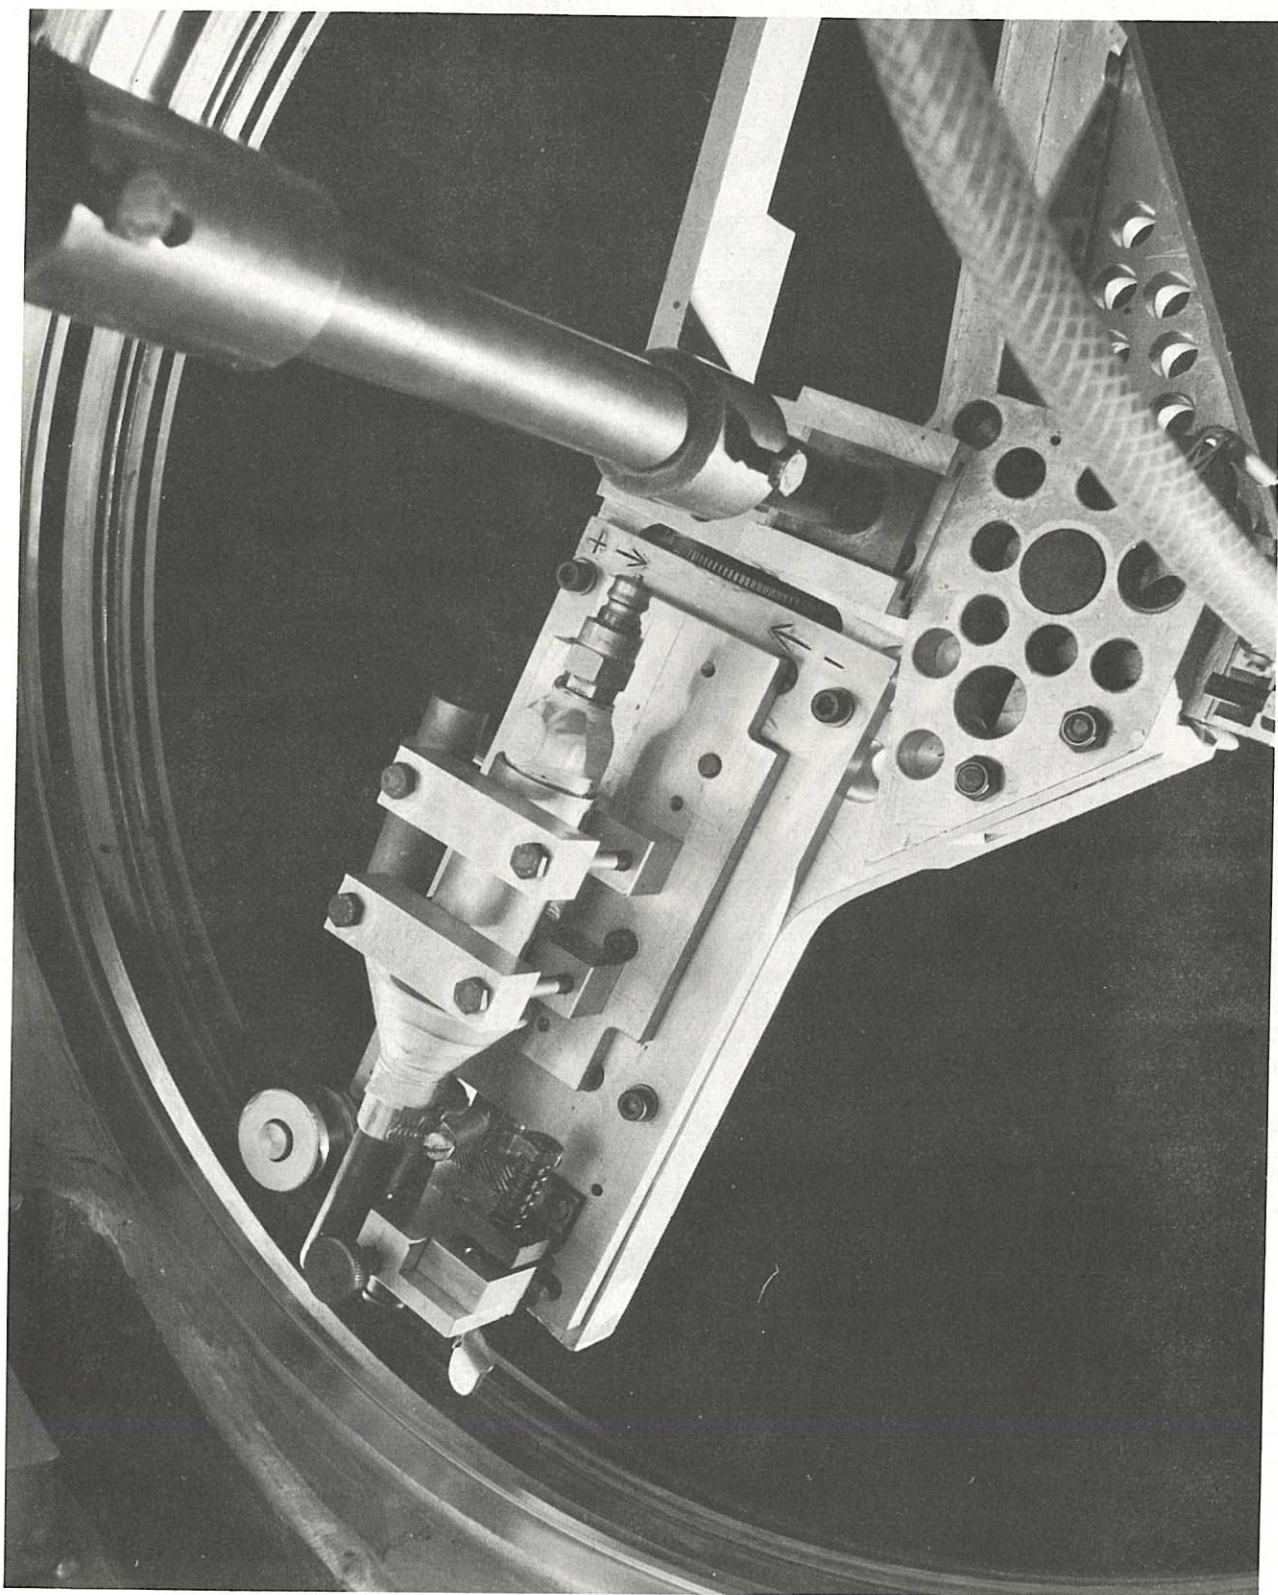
Machine set up in a module in preparation to machine inserts concentric
